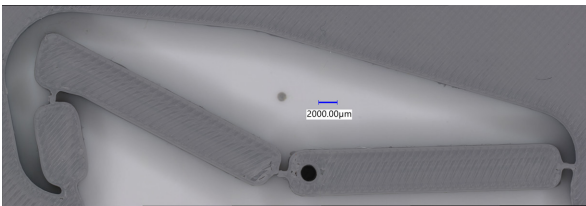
Closeup of the bistable element showing failure in flexure three.
